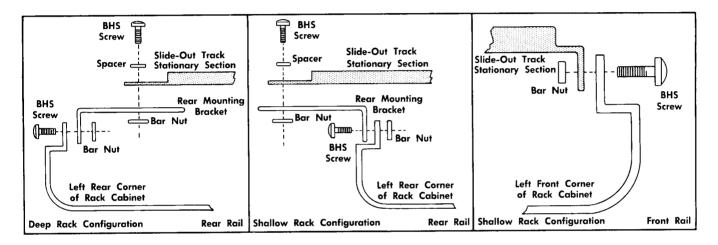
Rack rails not tapped for 10-32 machine screws.
